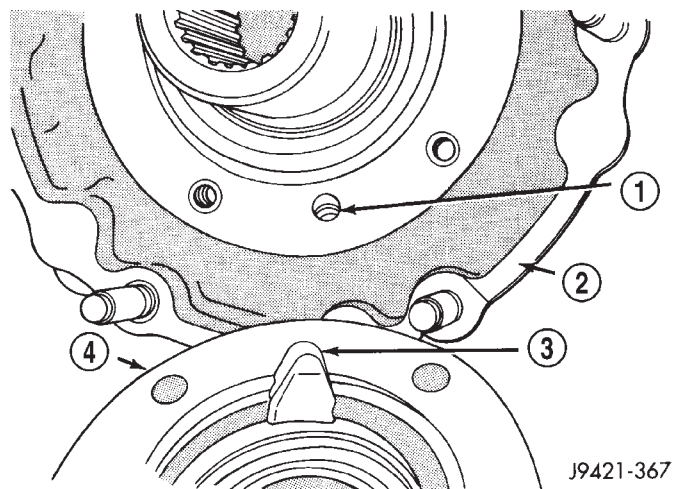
Aligning Retainer Oil Channel and Case Feed Holes
